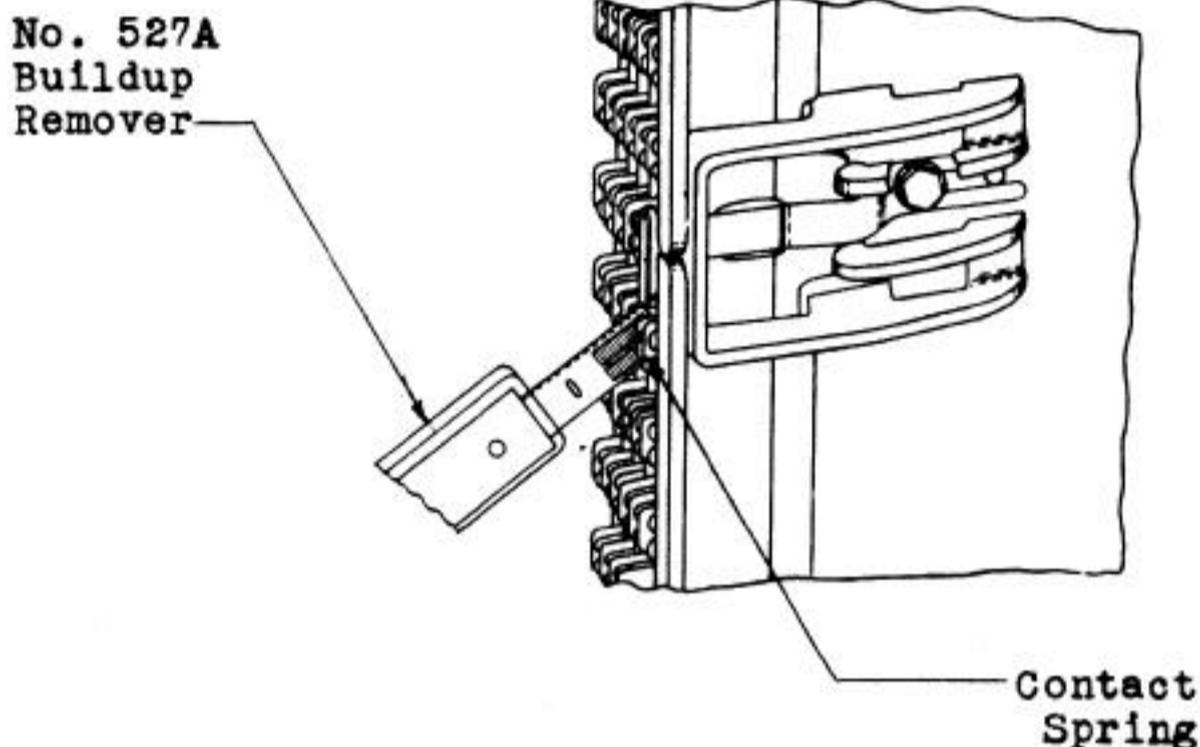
Method of Removing Buildups on 245 or 254 Type Relay Contacts
